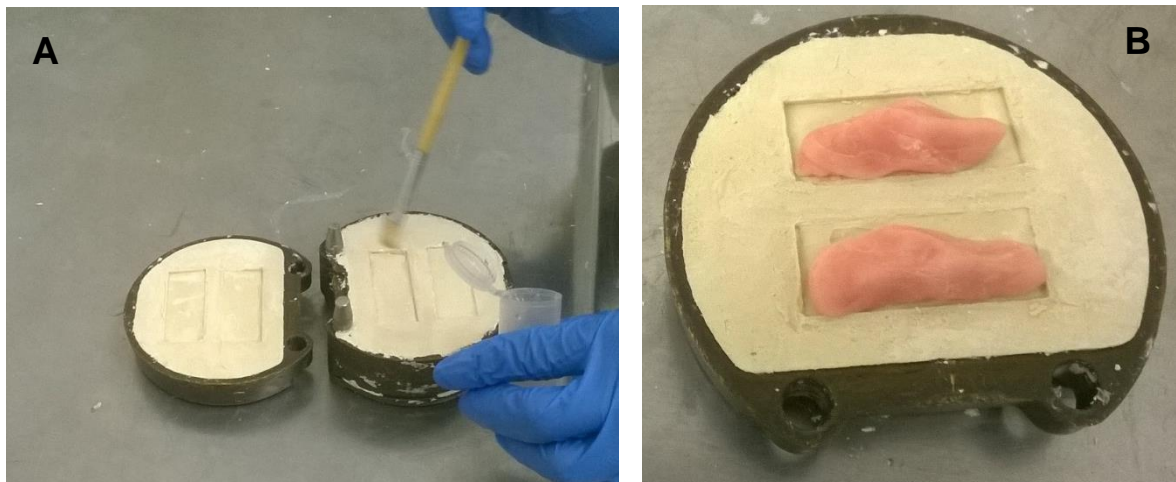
Packing process: (A) prepared mould; (B) PMMA dough in mould cavity.
